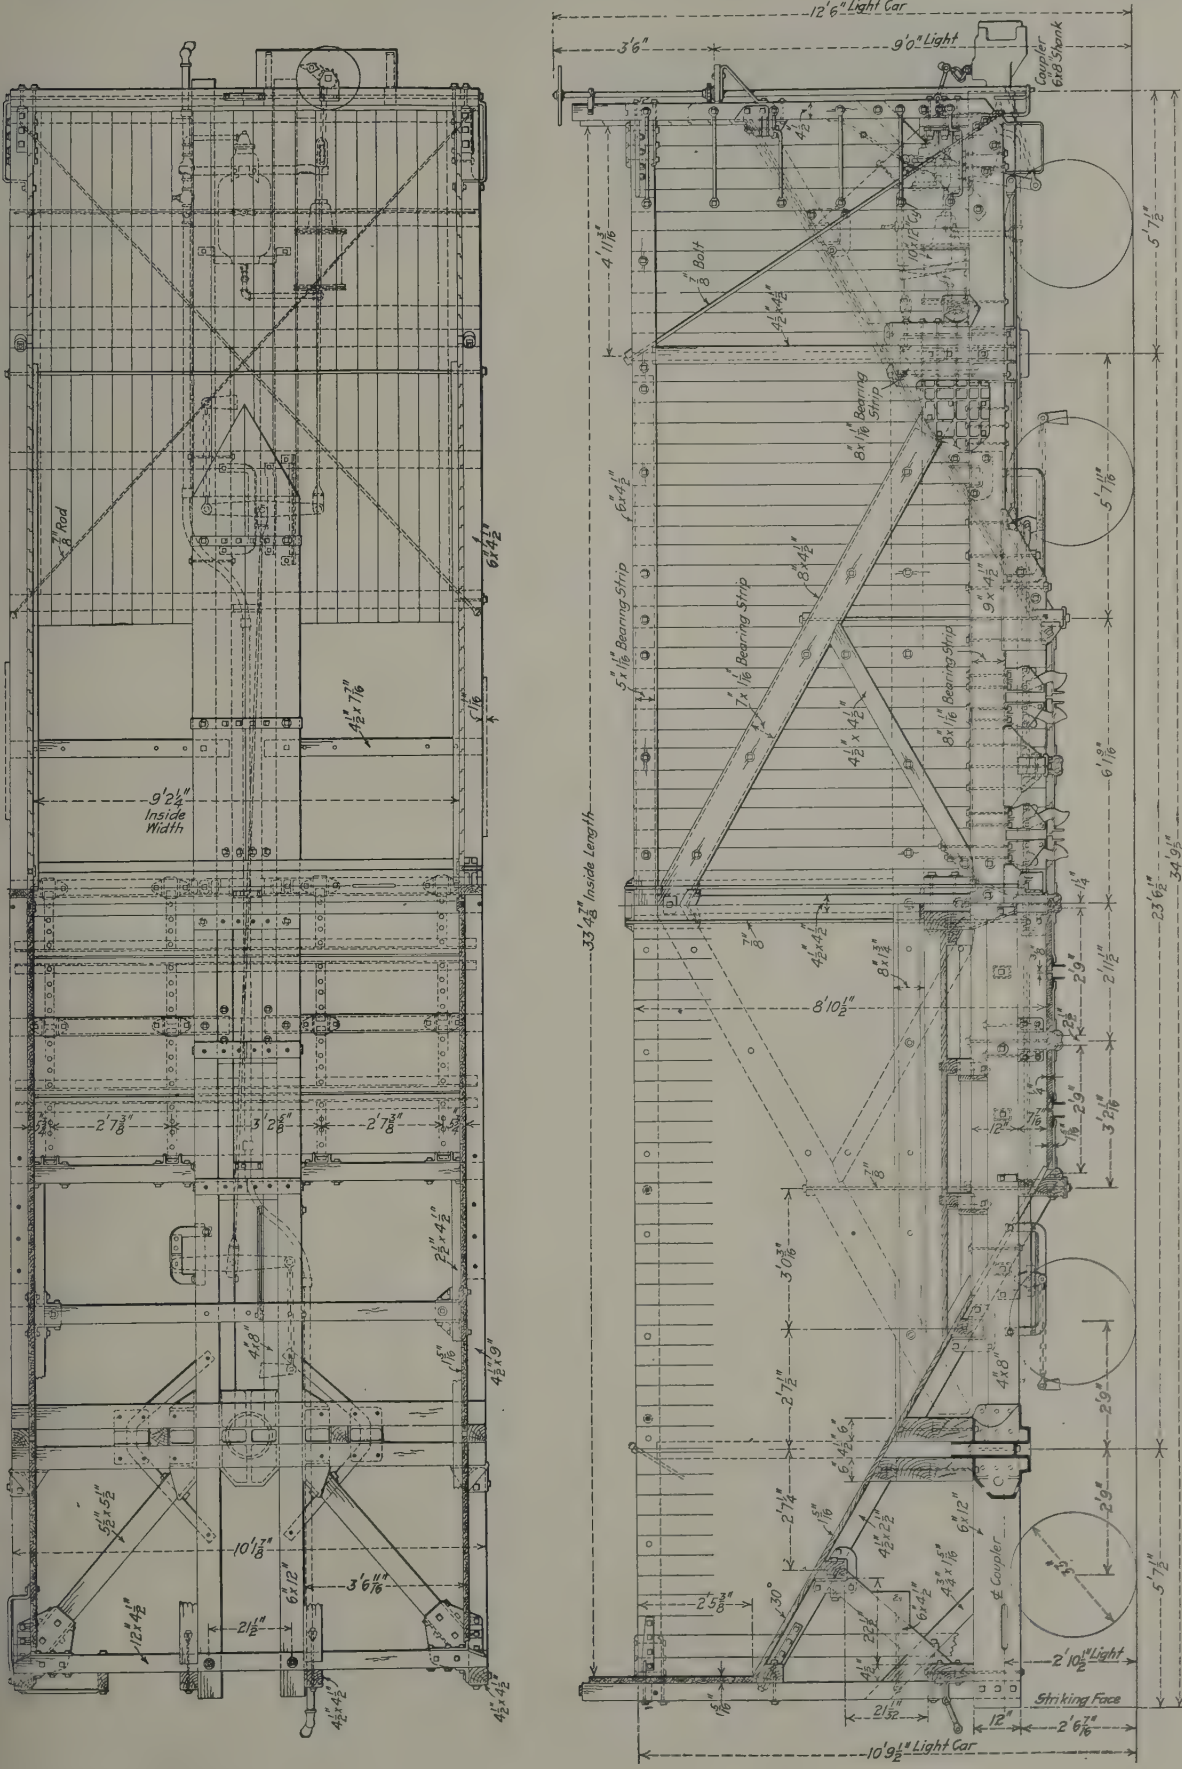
Plan and Elevation of the Norfolk & Western Wooden Hopper Car Shown in Figs. 81-82.
